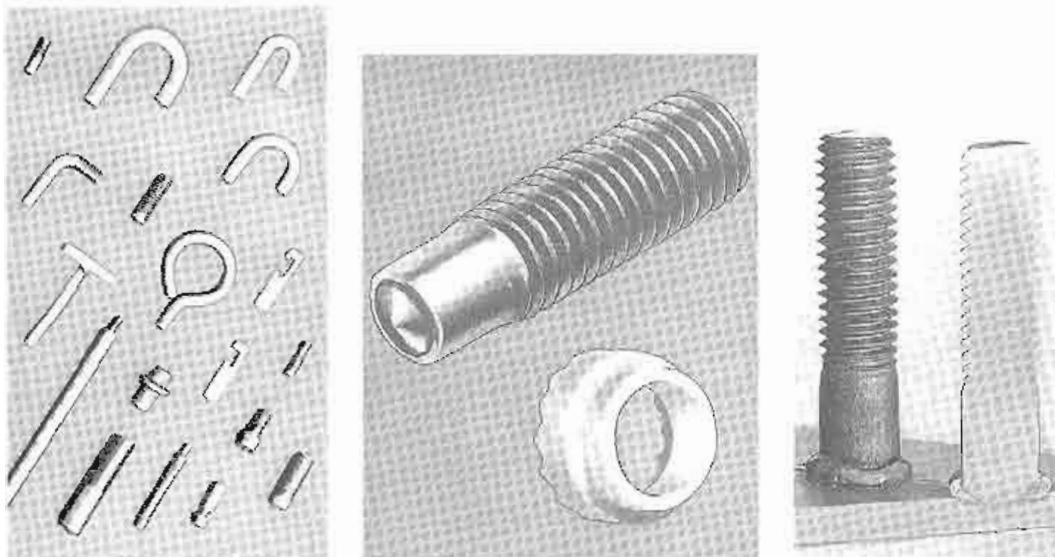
(Left) Types of studs used for stud welding. (Center) Stud and ceramic ferrule. (Right) Stud after welding and a section through a welded stud. (Courtesy of Nelson Stud Welding Co., Elyria, OH)
